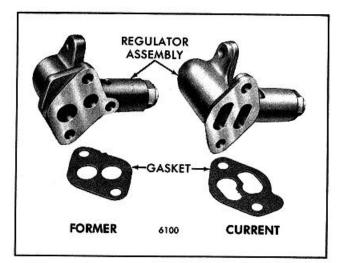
Lubricating Oil Pressure Regulator (Former and Current).
